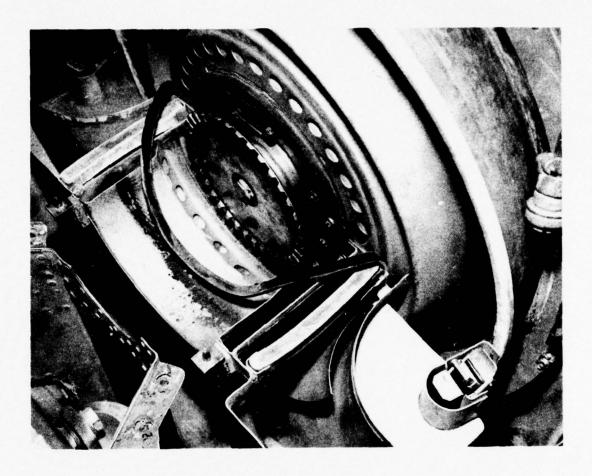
Adhesive failure of gasket attached to deflector assembly.
